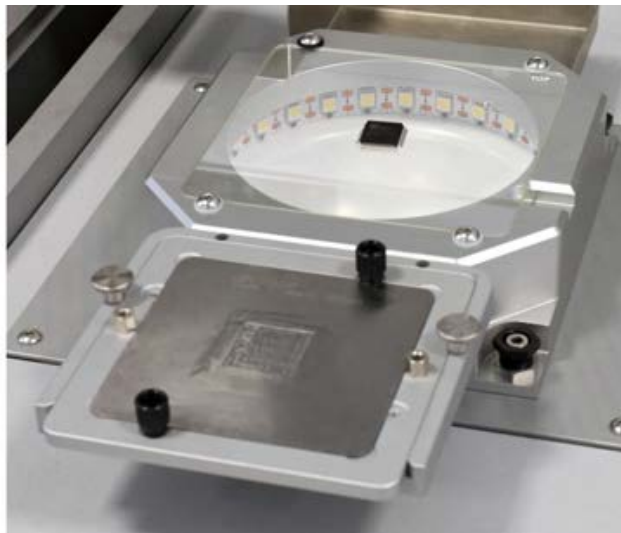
Example picture: The dip stencil coated with flux material gel is to be inserted into the framed stencil. The component is to be placed on the glass plate of the component holder.
